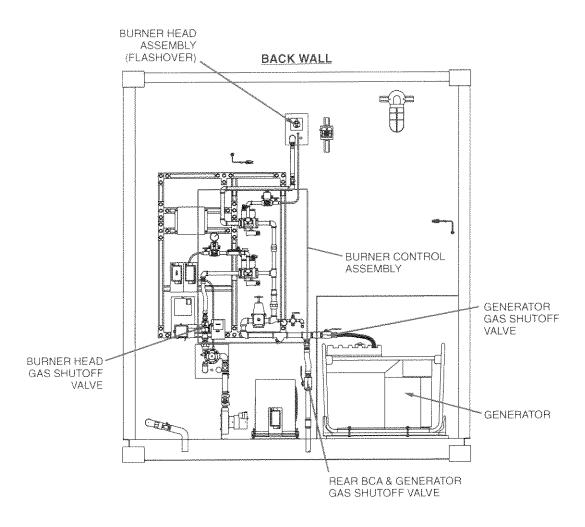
Propane Gas Shutoff Valves (Equipment Room Back Wall)
